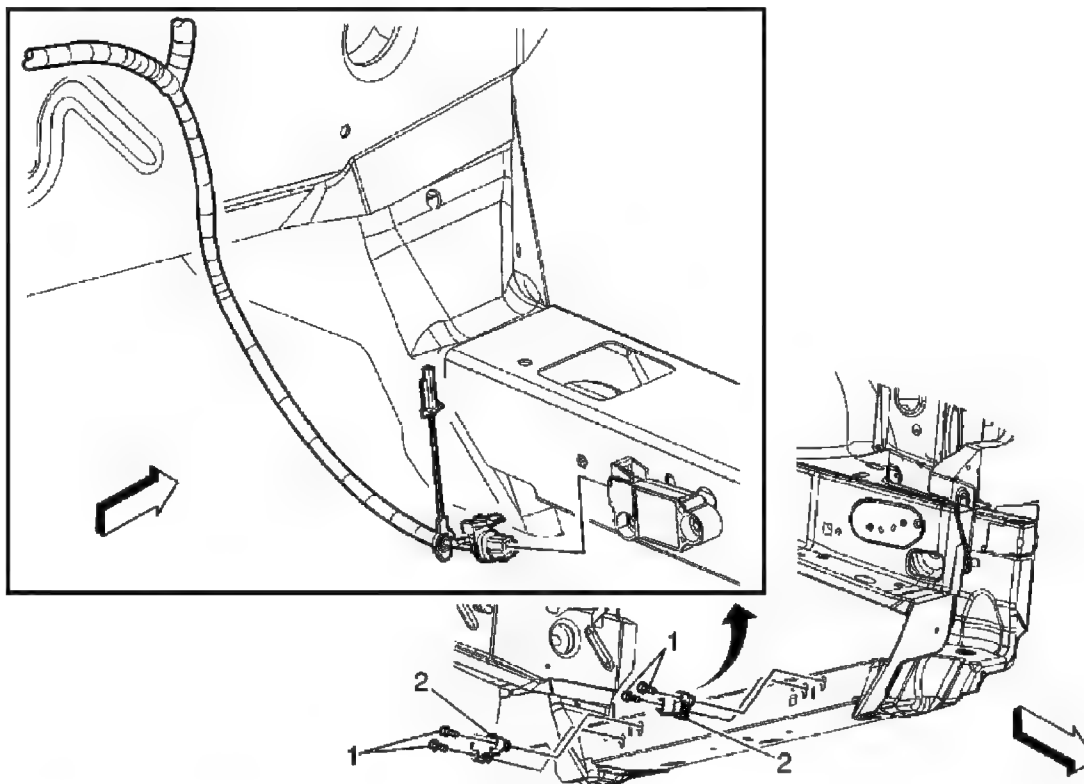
Identifying Inflatable Restraint Front End Sensor
